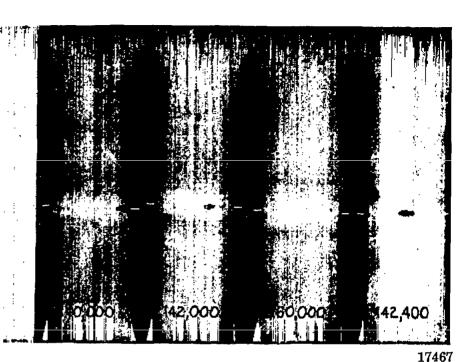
Radiograph of metal-arc-welded static tension specimens in 1/8-inch SAE 4130 sheet.
